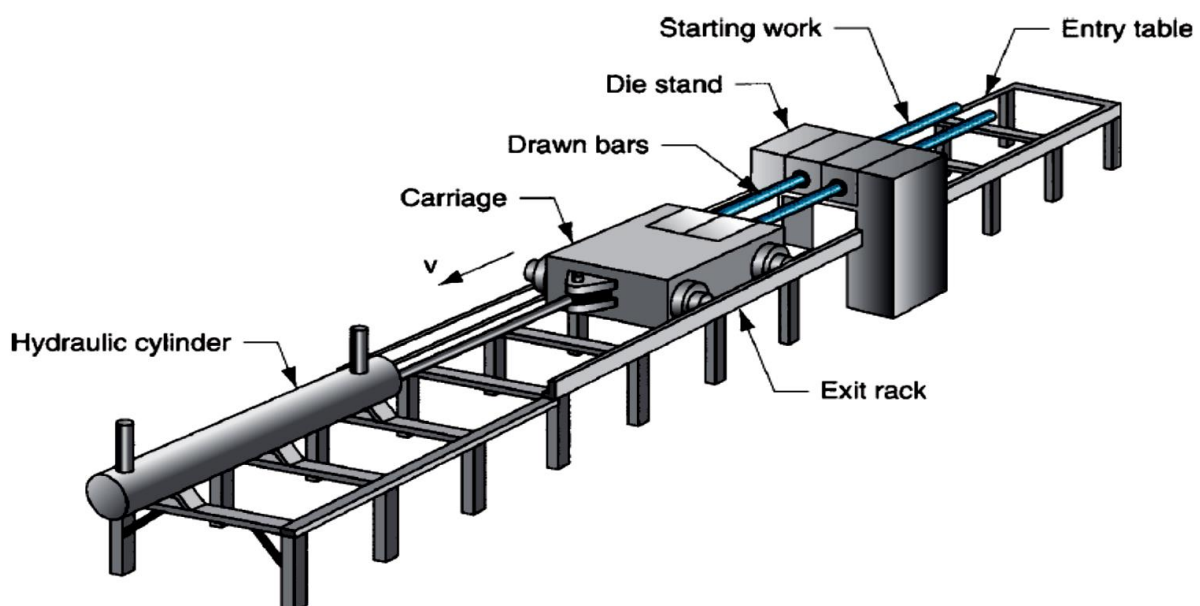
hydraulically operated draw bench for drawing metal bars
